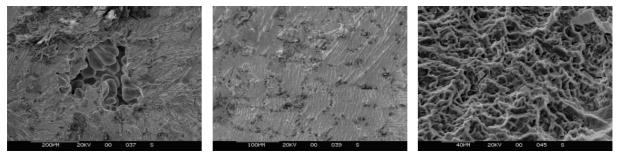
Fractography features on fatigue tested samples produced with low pressure permanent mould process. The primer zone of the crack initiation (left), the propagation zone (centre) and the final ductile fracture zone (right)
